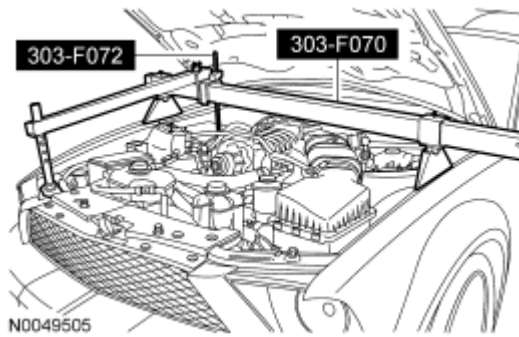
Lowering Engine Onto Engine Support Insulator Using Special Tools (303-F072) & (303-F070)
